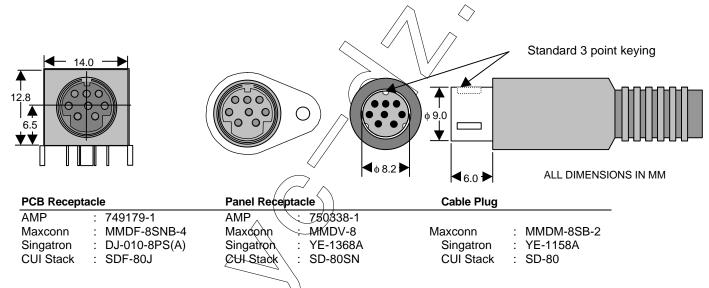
8-pin Miniature DIN Receptacle & Plug Dimensions and Recommended Manufacturers' Part Number.
